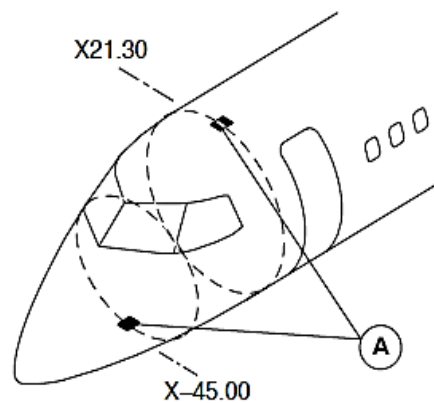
177 TCAS PROCESSOR UNIT LOCATOR
